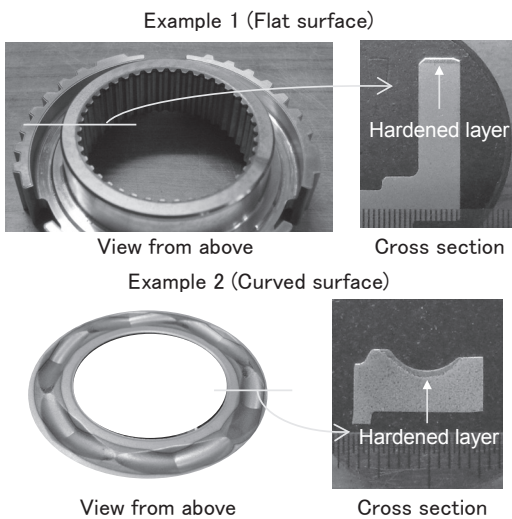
Examples of applications of laser hardening of circular shape surfaces
